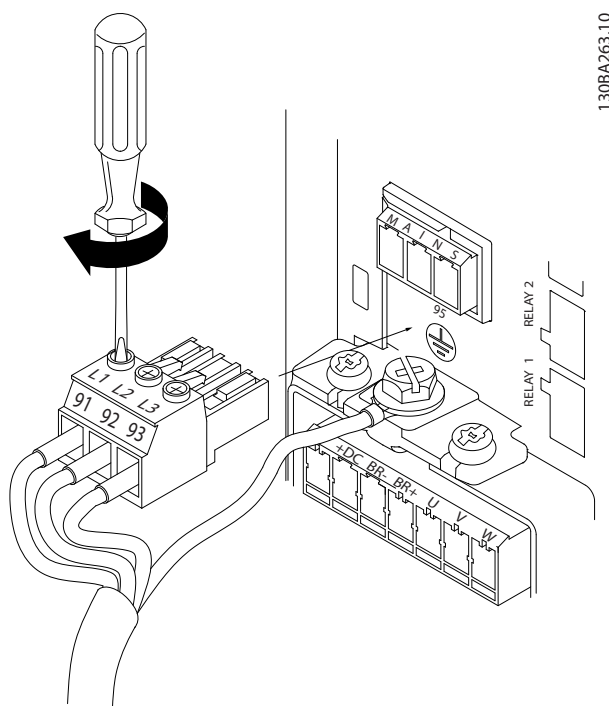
Mounting Mains Plug and Tightening Wires
